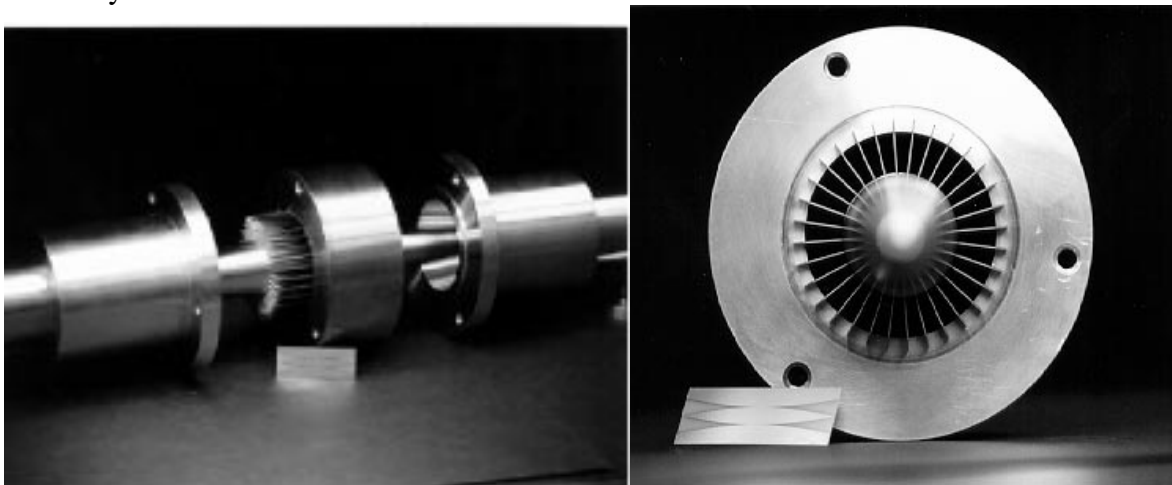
(a) Exploded view of coaxial combiner. (b) Axial view of center section with finline cards.
